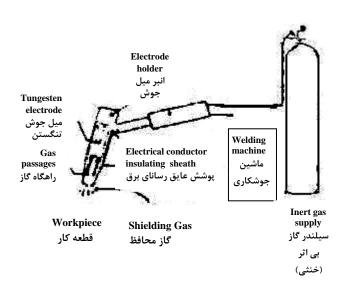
GAS TUNGSTEN ARC WELDING EQUIPMENT ARRANGEMENT
